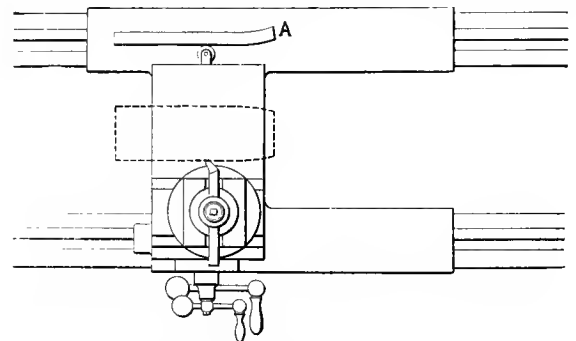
ARRANGEMENT FOR FINISH-TURNING THE CASE ON AN ENGINE LATHE
